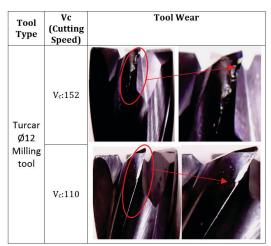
Tool wear for 45min. machining of Ø12 Turcar
